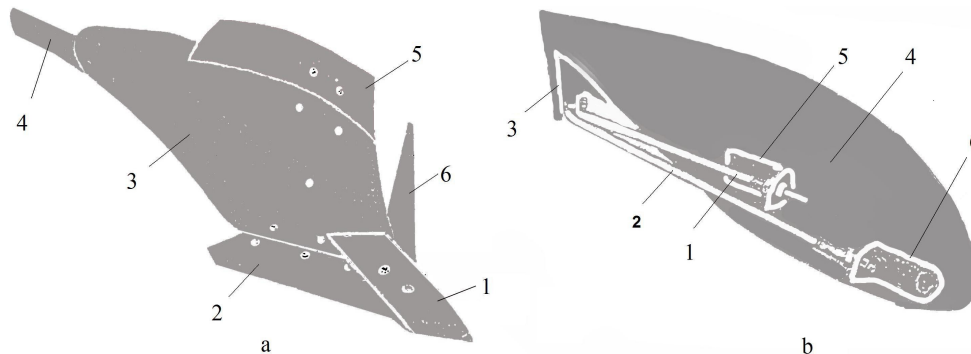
Semi-helicoidal body KAUR-40 AGS having an adjustable curvature of the mouldboard: a – frontal sight: 1 – point (chisel); 2 –share; 3 – mouldboard; 4 – mouldboard extended lamina; 5 – trash-board (skim coulter); 6 – knife; b – rear sight: 1, 2 – spreaders for support and regulation of the share mouldboard curvature; 3 – foot of body; 4 – mouldboard; 5, 6 – struts
